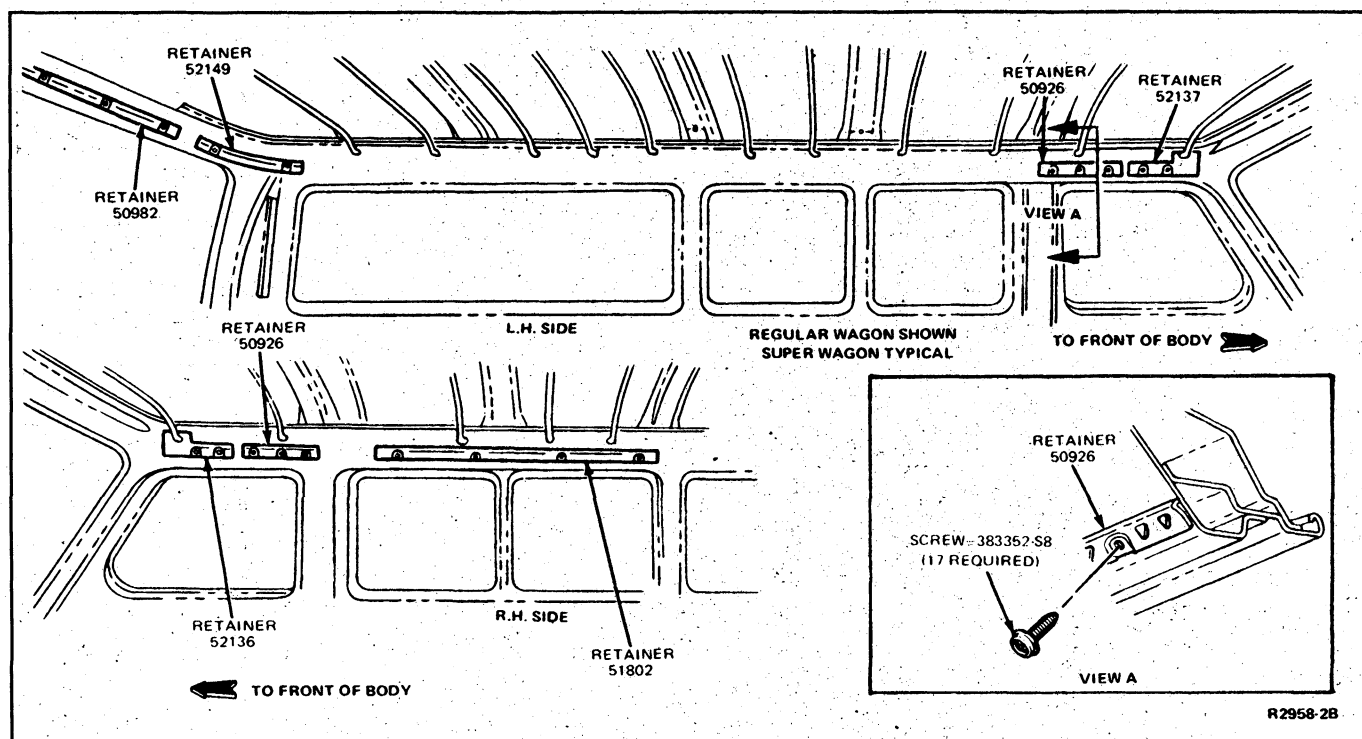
R.P.O. Headlining Retainers—E-150—E-350 Hinged Door
